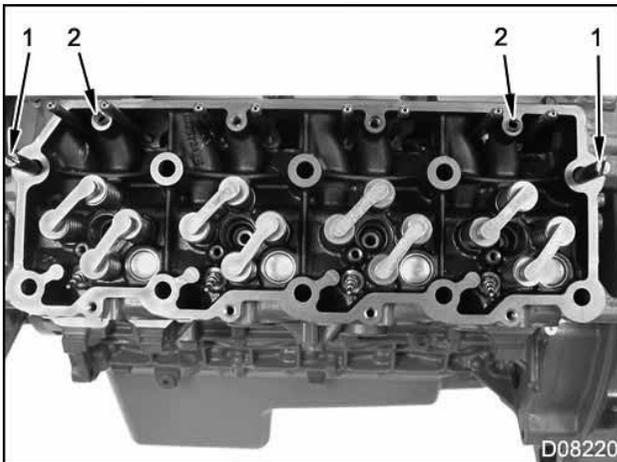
Alignment guides and dowel sleeve bushing in 2004 and 2005 Model Year cylinder head (Eight tapped M8 holes)
